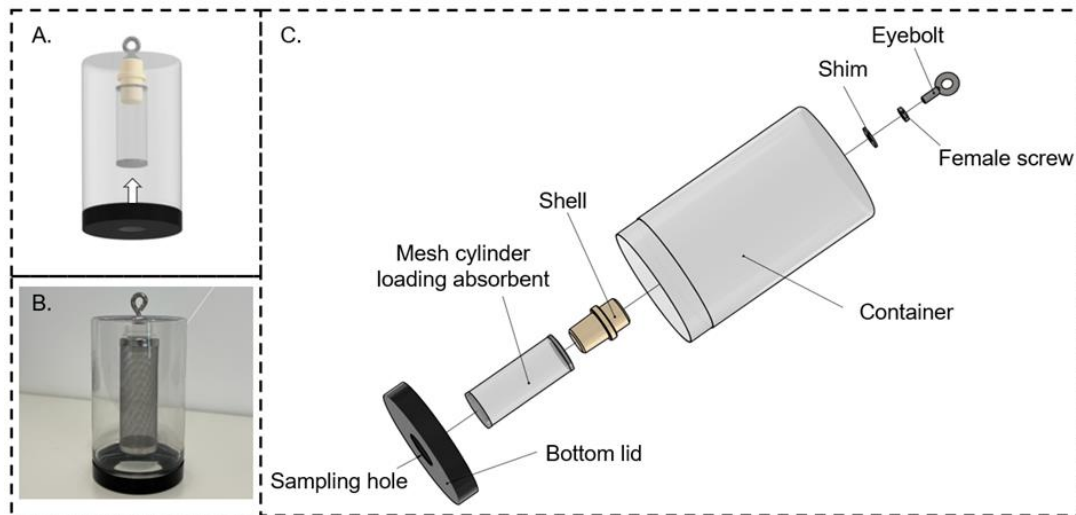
Sketch of the sampler design (A), photo of the sampler (B), exploded assembling drawing (C)
